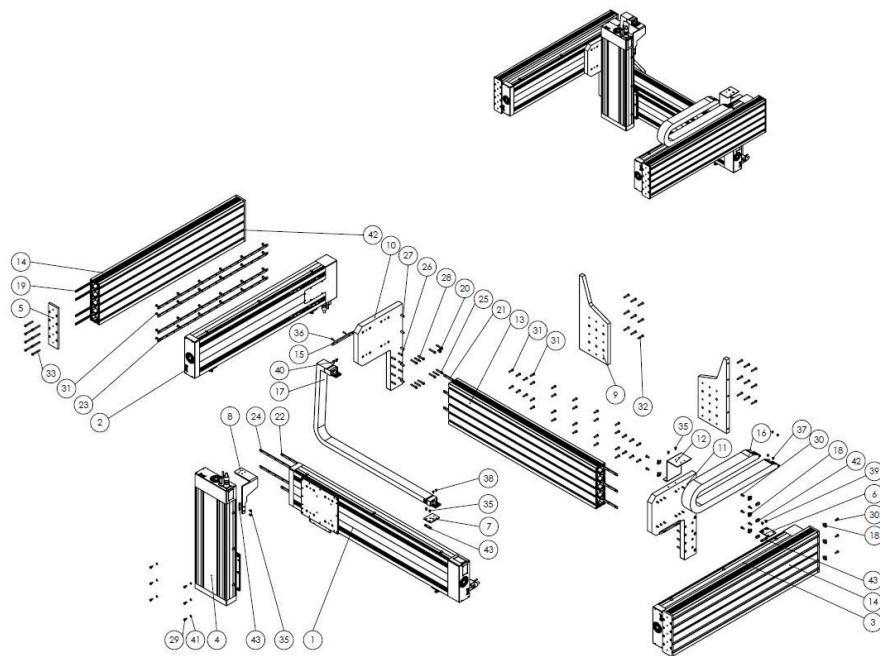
Exploded view CNC Base machine Gantry OverHead M50 (without tool)
